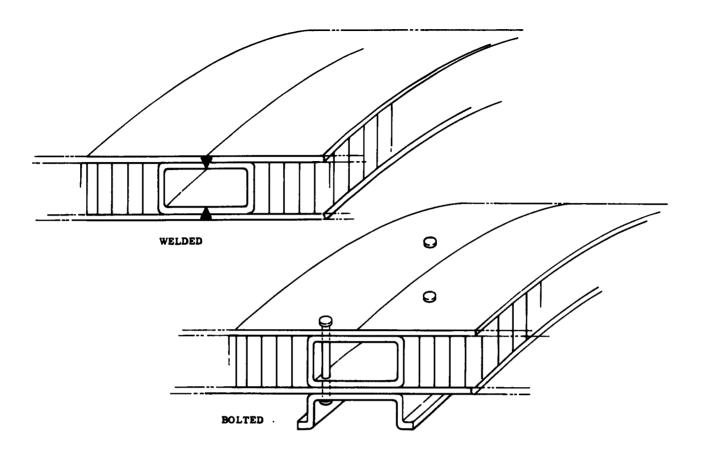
CURRENT METHODS FOR JOINING STRUCTURAL SANDWICH PANELS
